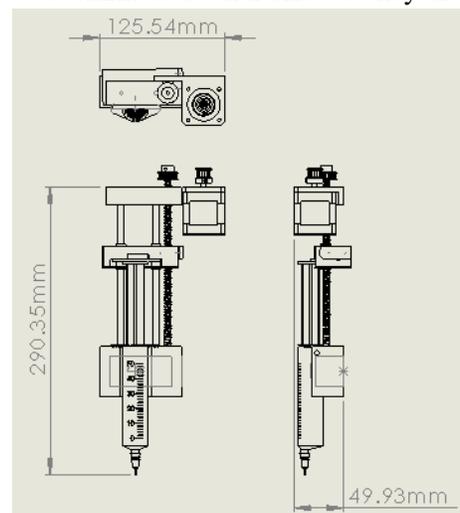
The syringe pump assembly with significant dimensions labelled.
